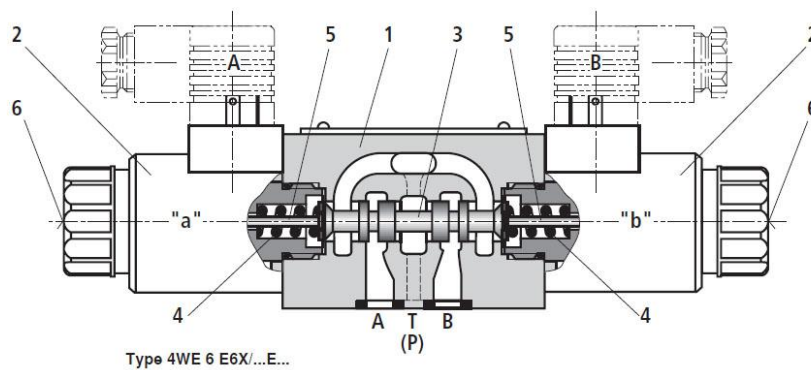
Internal view, Bosch Rexroth 4WE 6 J6X/EG24K4 directional valve. [17]
